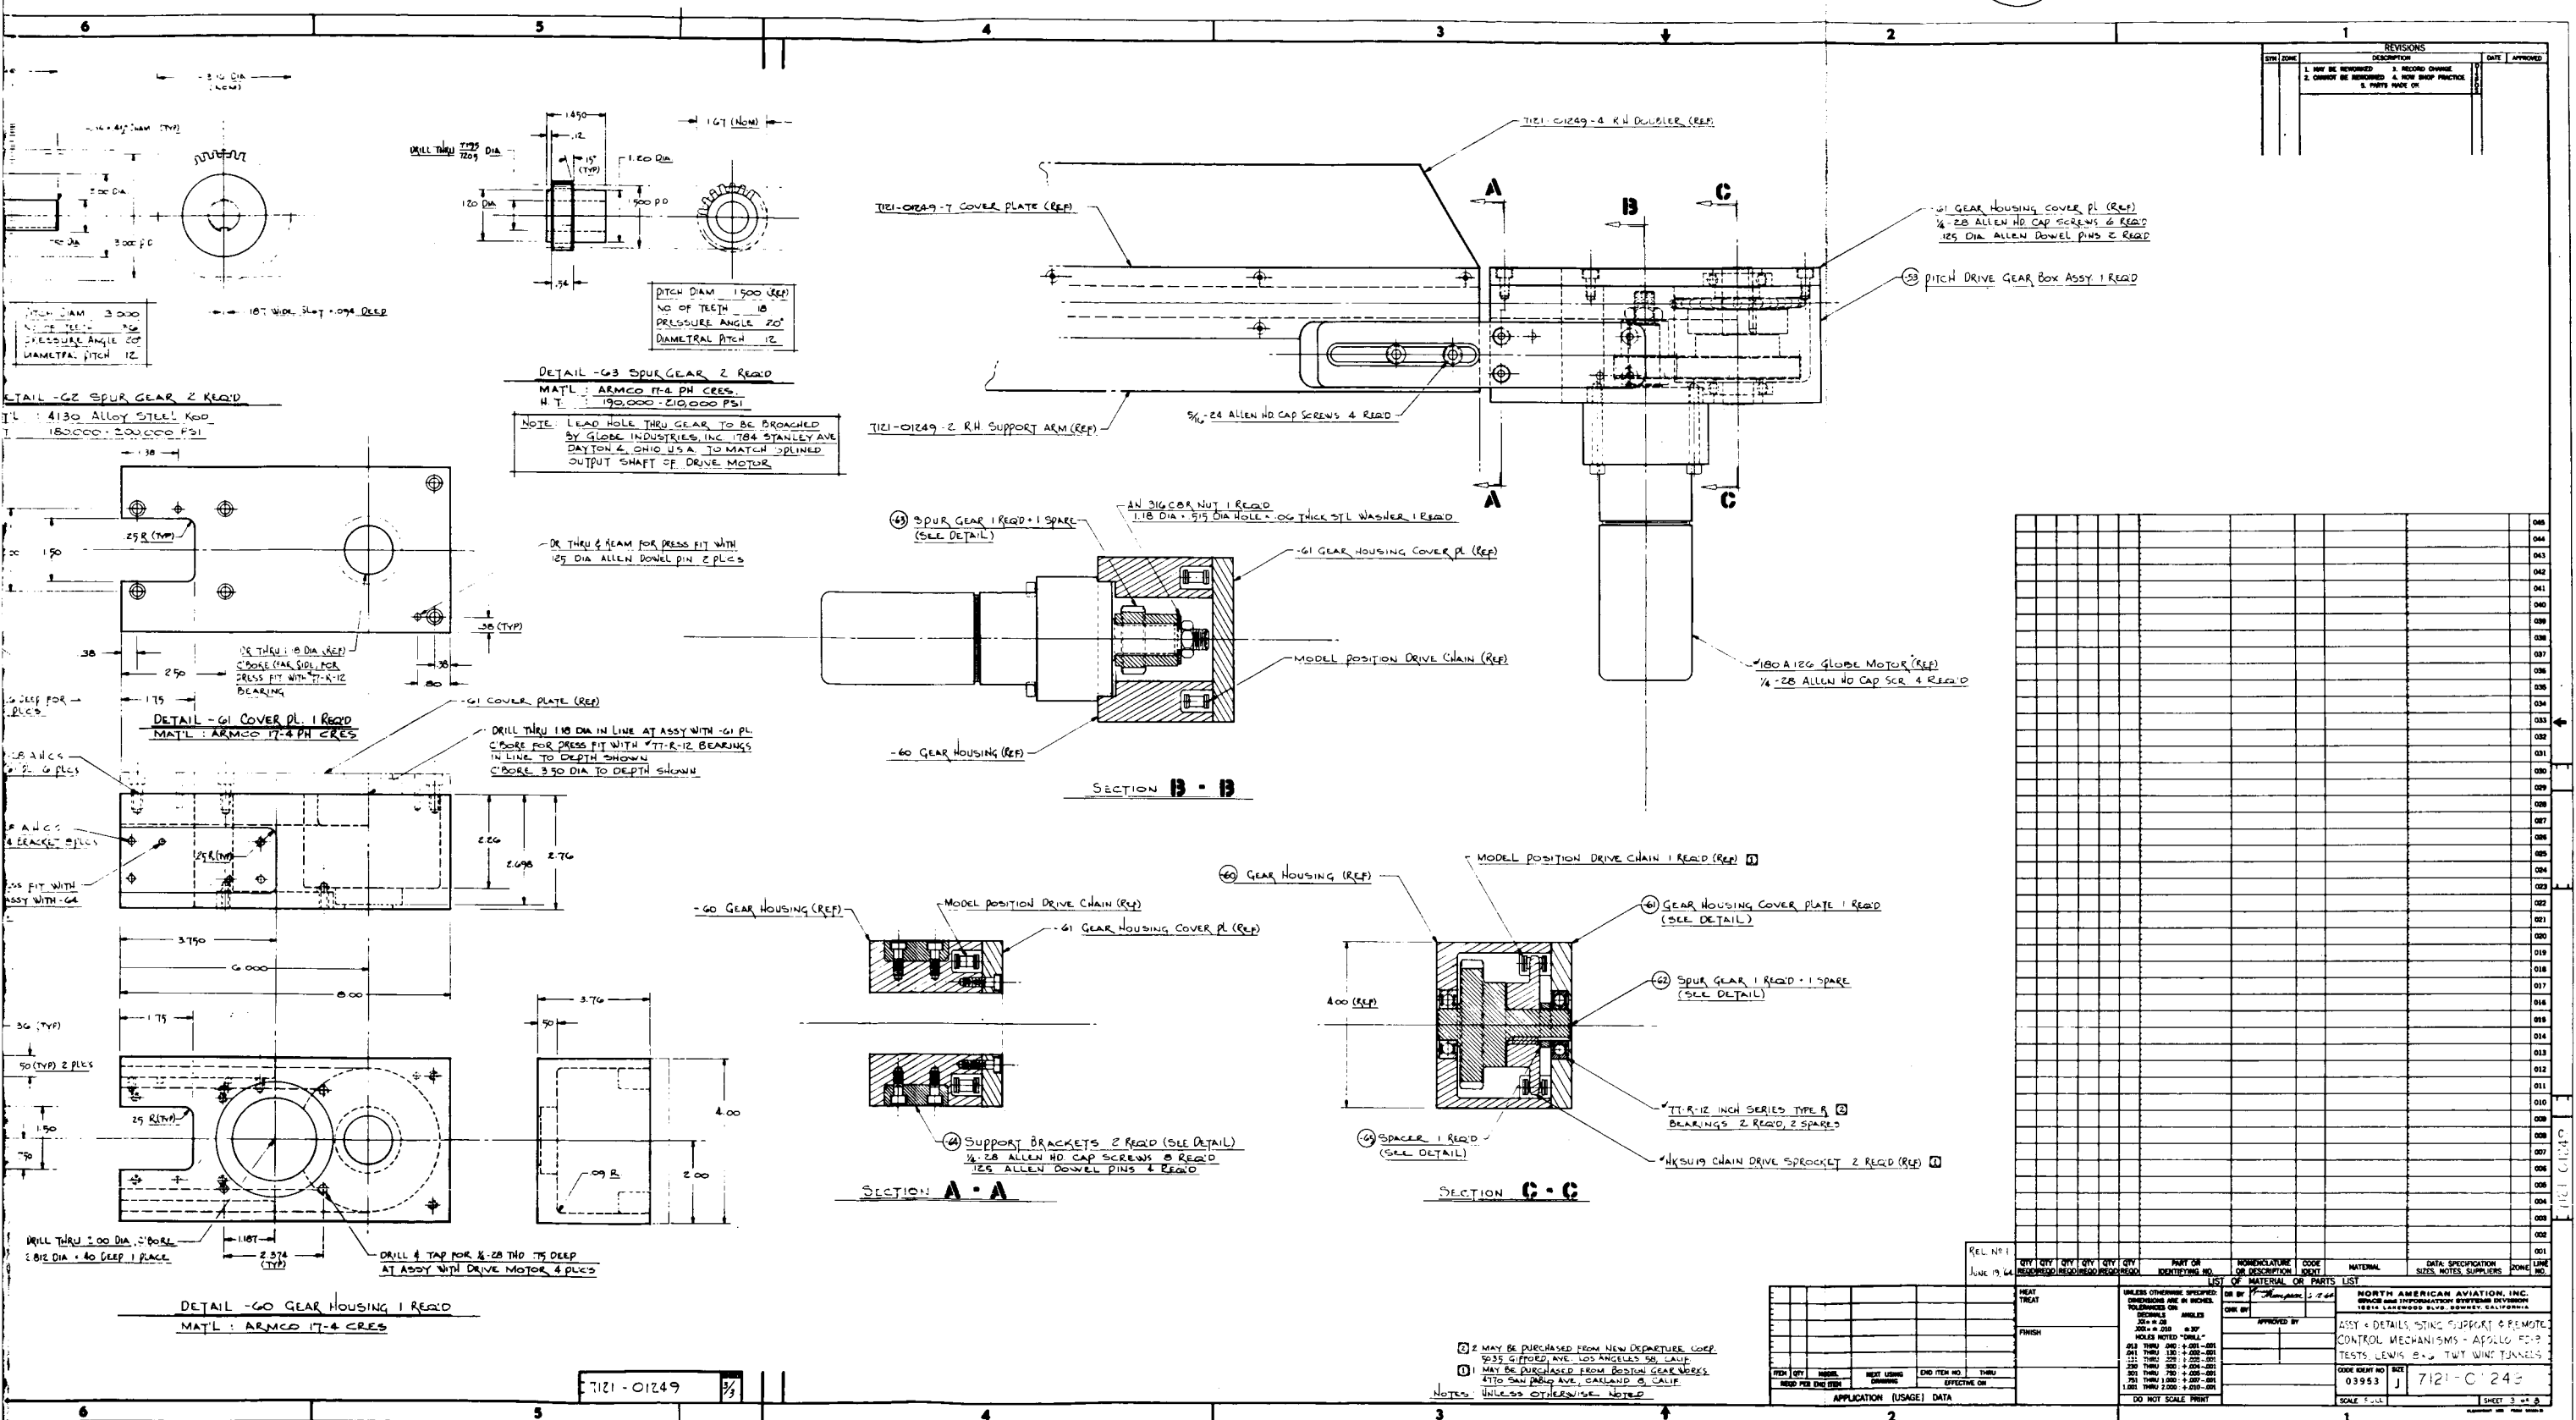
Assembly and Details, Sting, Support, and Remote Control Mechanisms Apollo FD-9 Tests - TWT, Lewis 8- by 6-Foot and 10- by 10-Foot (Sheet 3 of 4)
